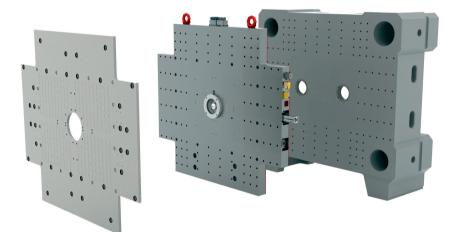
Graphical representation of the arrangement of (from left to right) magnetic clamping plate, hot runner adapter plate and fixed mold mounting plate in the Engel duo 2700. © A&E Produktionstechnik
